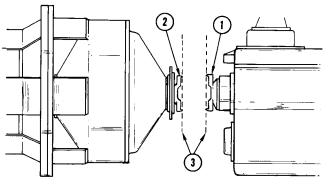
ANGULAR ALIGNMENT 1. Transmission 2. Clutch Shaft 3. Parallel Surfaces
